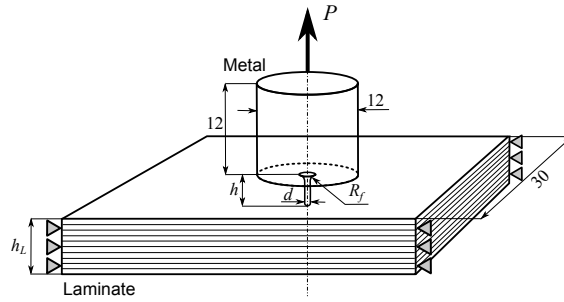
Schematic of single-pin pullout test geometry and fixturing. (Unit: mm)
